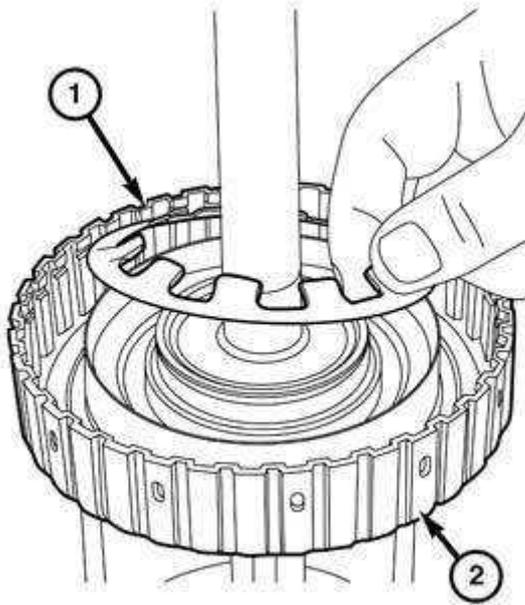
3-5-R Clutch Balance Piston & Piston
